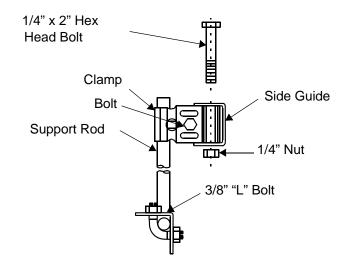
Rod Secured to Mounting Angle, Clamp Over Support Rod, Bolt Tightened 4. Follow the Splice/Connection directions below.
